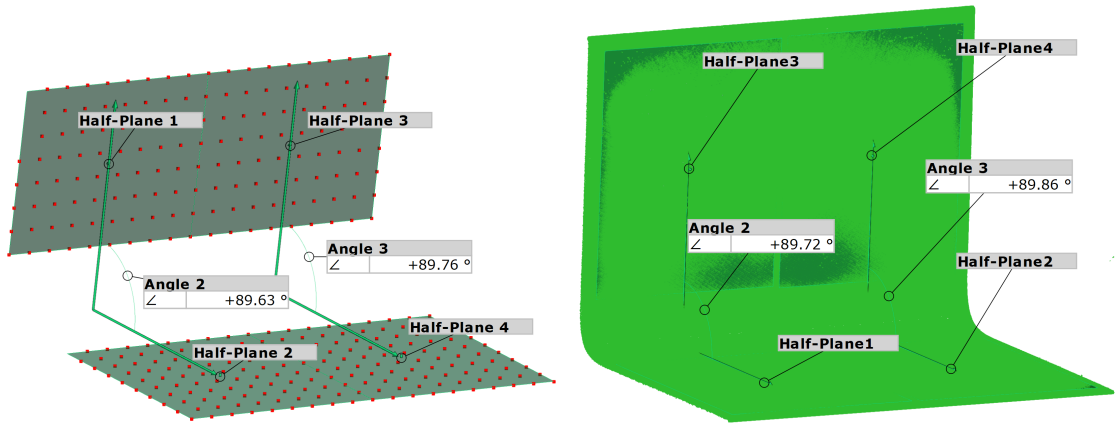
Splitting the steel tool surface in half to characterize it by two angles. Left: CMM, right: 3D scanner
